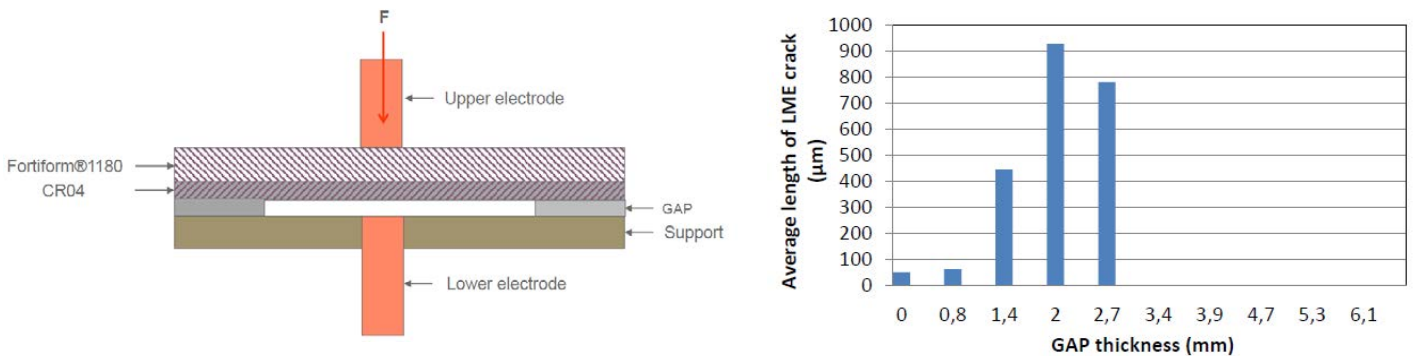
Impact of the clearance between the welding electrode and the sheet on LME significance.
